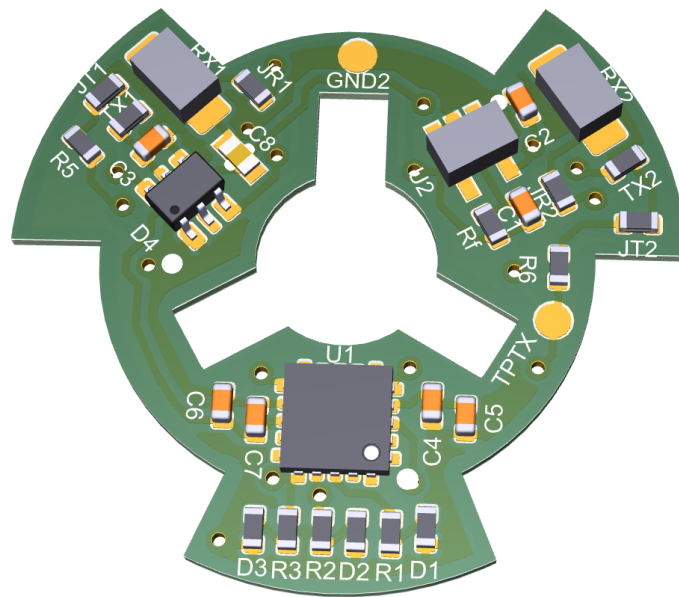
Top 3D view of version 1 PCB of OMP
